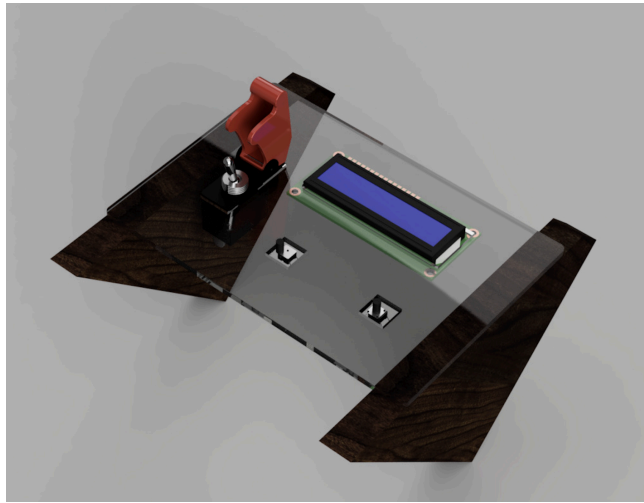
Fusion 360 Drawing of Inverted Pendulum Control Panel Assembly Render
